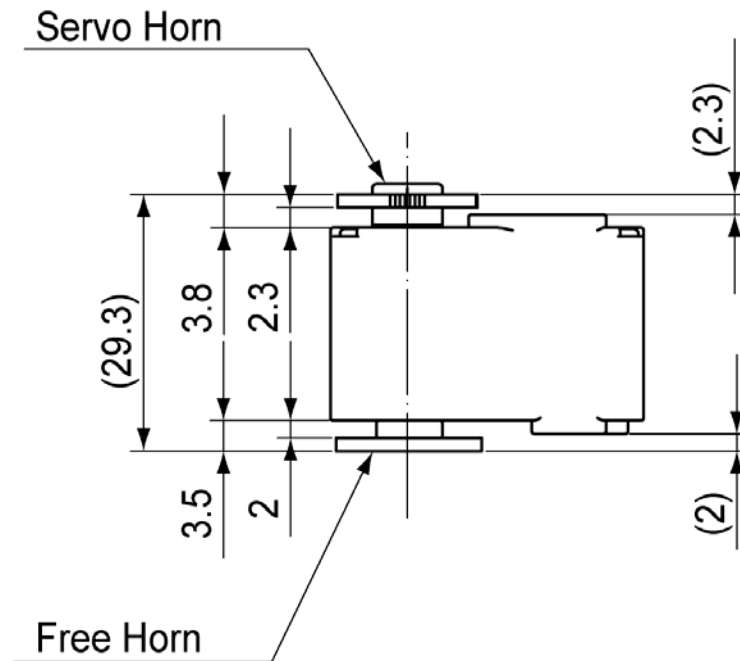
RS301CR/RS302CD with Bottom Case-Shaft and Free Horn
